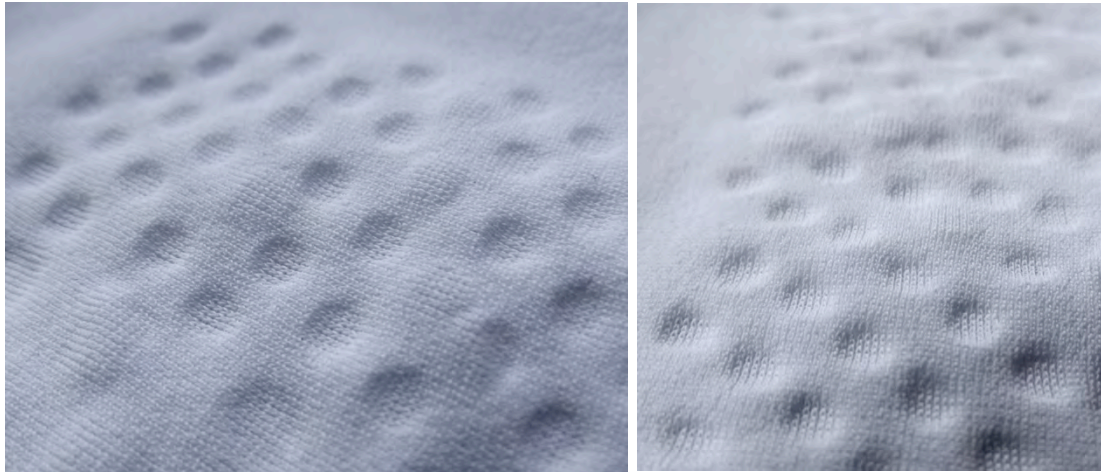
Laser Moulded Dimpled Fabric Texture
